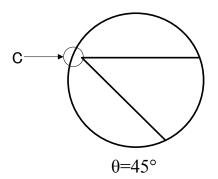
Bending mechanism of the sheet metal using the proposed punch tool
